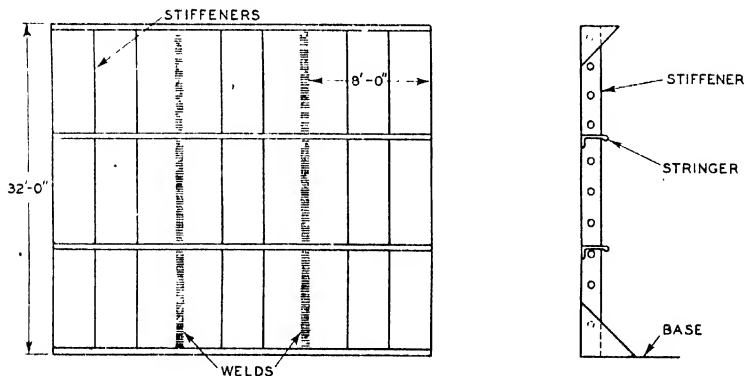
DESIGN OF PREFABRICATED WELDED TANKER BULKHEADS
